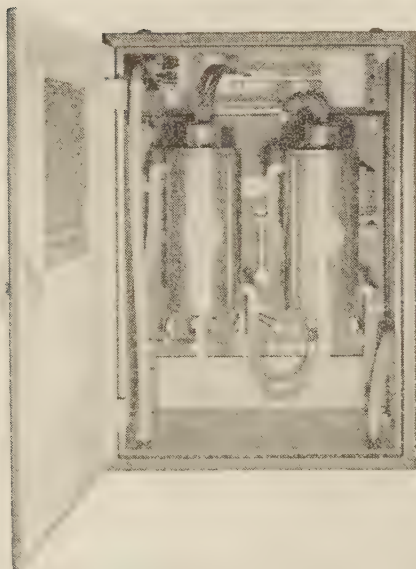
(c) IGNITRON CONTACTOR SWITCHES ON AND OFF RESISTANCE WELDER POWER
